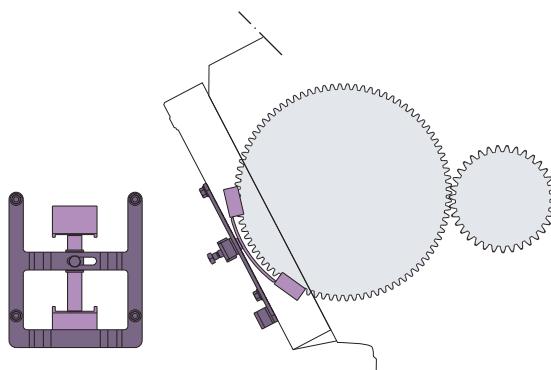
Mounting support 800 275 for camshaft gear wheel
